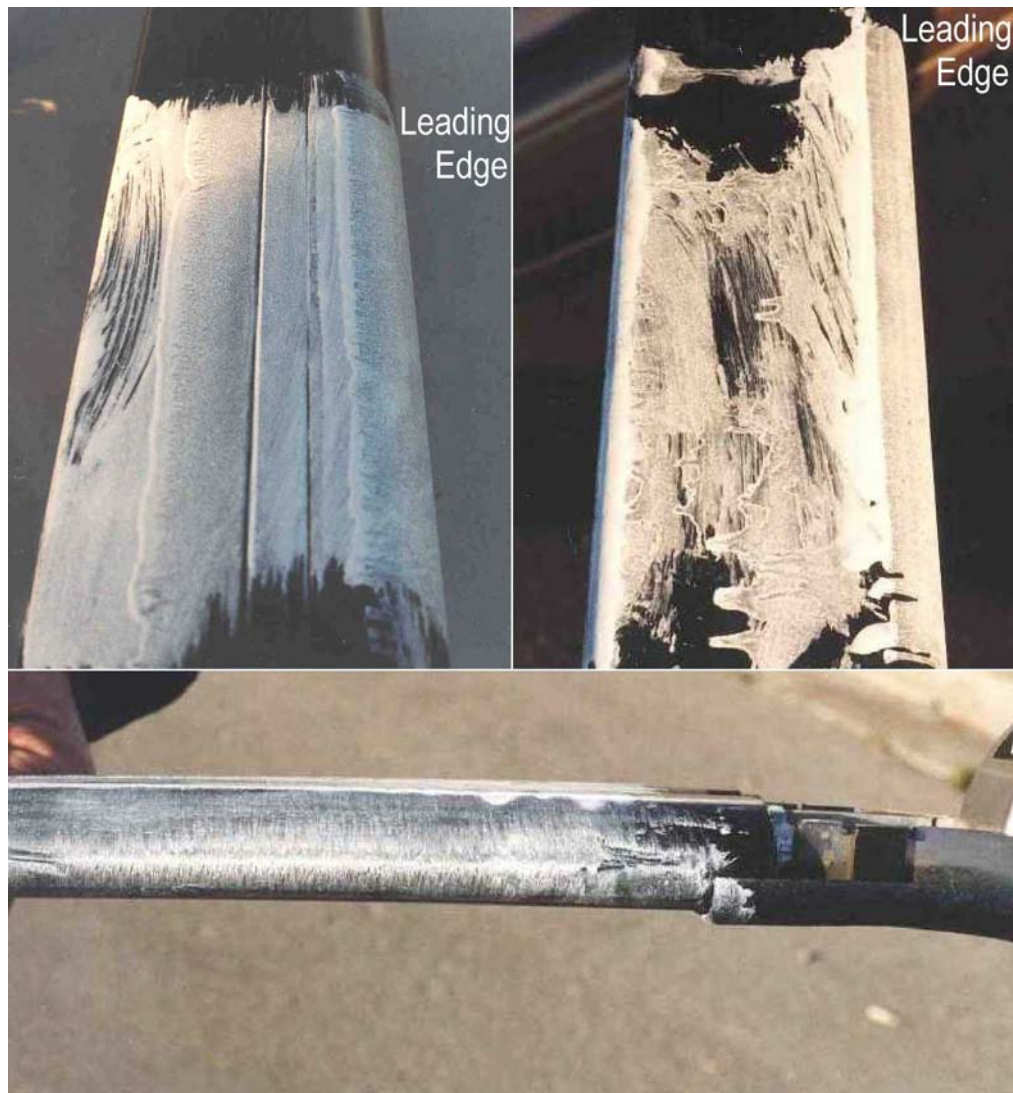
Top, bottom and front views of the A-bar with indicator paint.
